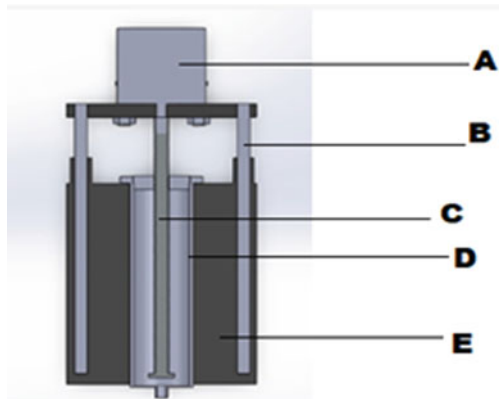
shows the final rendered image of the proposed screw-based extruder. Figure 2 shows the cross-sectional view of the extruder. The various components that are involved in the making of the extruder are:
